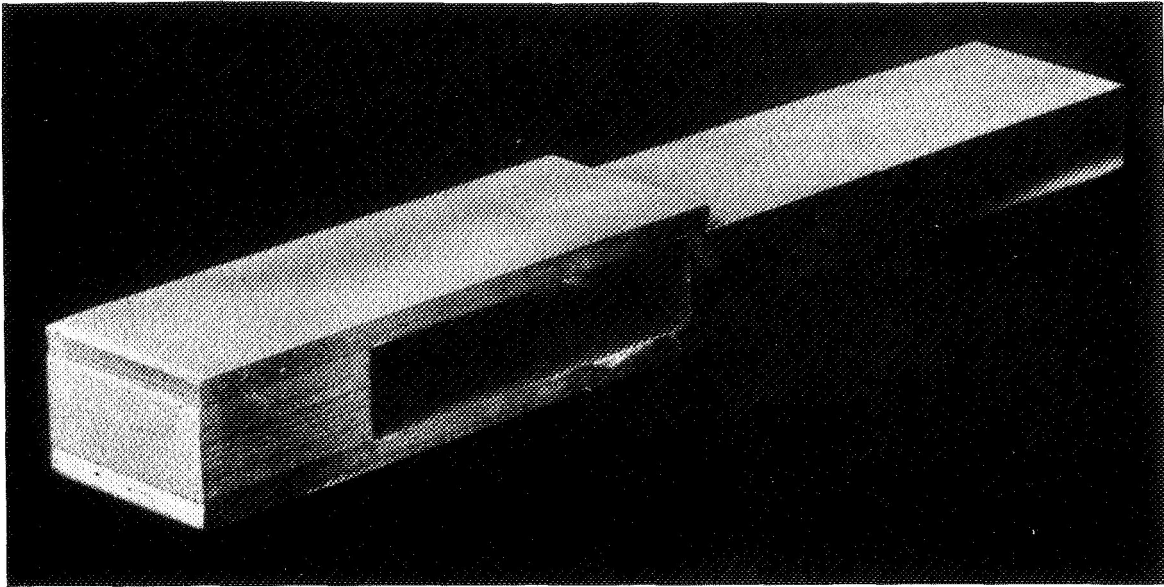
SHEAR-SPECIMEN DESIGN FOR 347 STAINLESS STEEL SELF-BOND (SPECIMEN 5)
